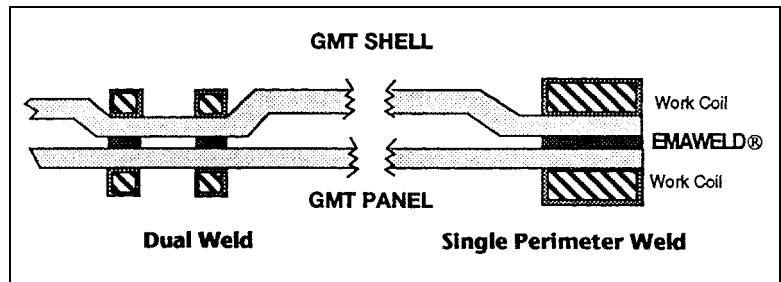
Panels composed of a GMT 40% glass mat composite used to produce station wagon structural load floors. Panels were welded using induction welding. Two coil designs are possible, depending on structural requirements of the weld: a single weld located at the end of the part, or a dual weld, placed at the interfaces of the flat panel and ribbed shell.
